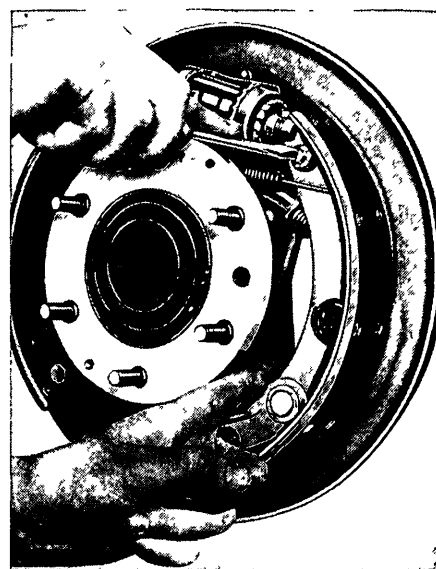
Adjusting Chevrolet rear brake toggle. This operation is necessary whenever brakes have been relined
